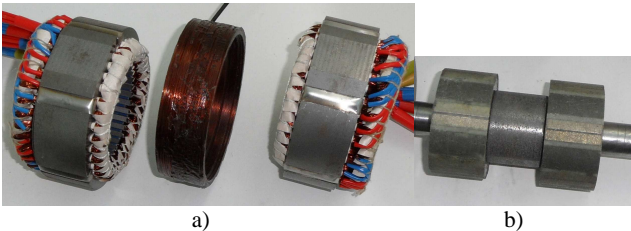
Parts of the ECPSM machine. (a) Stator. (b) Rotor.
